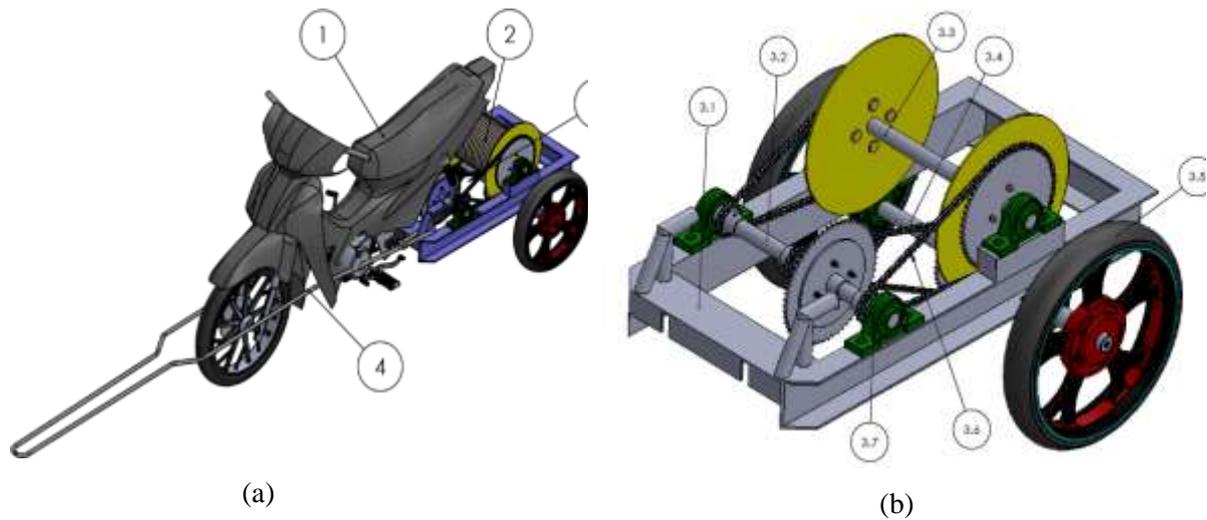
Design of the fisherman boat puller (b) Machine construction design
